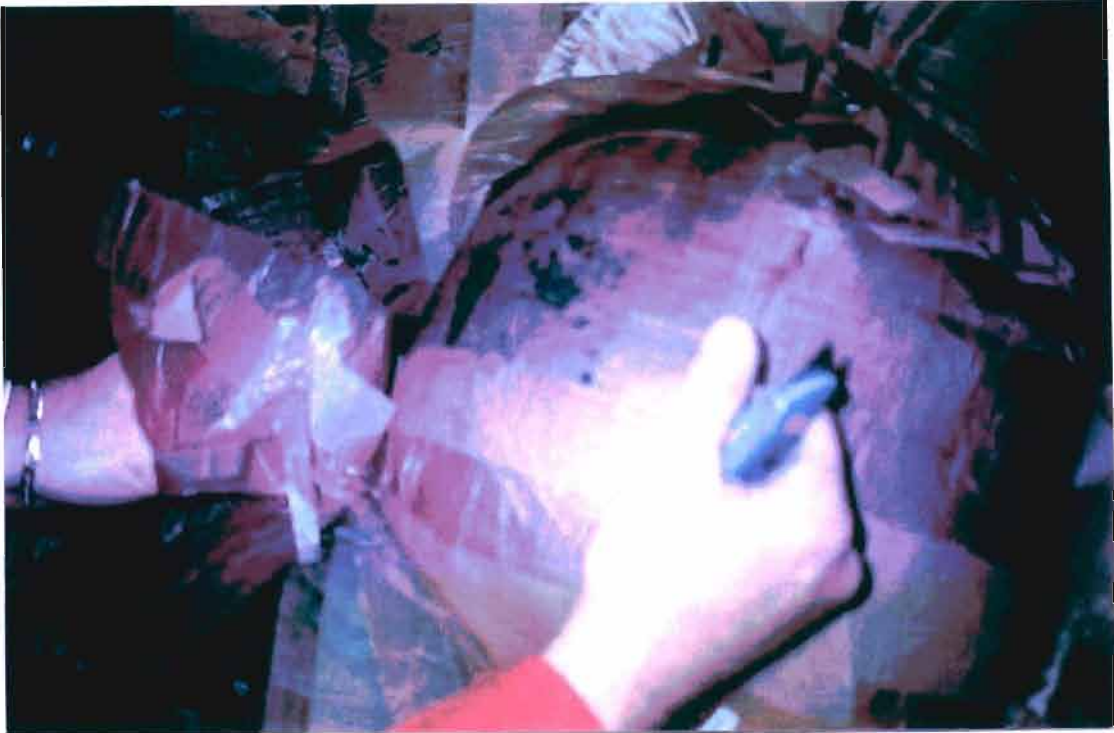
Stripped back insulating paper showing signs of partial discharge and treeing between paper layers.
